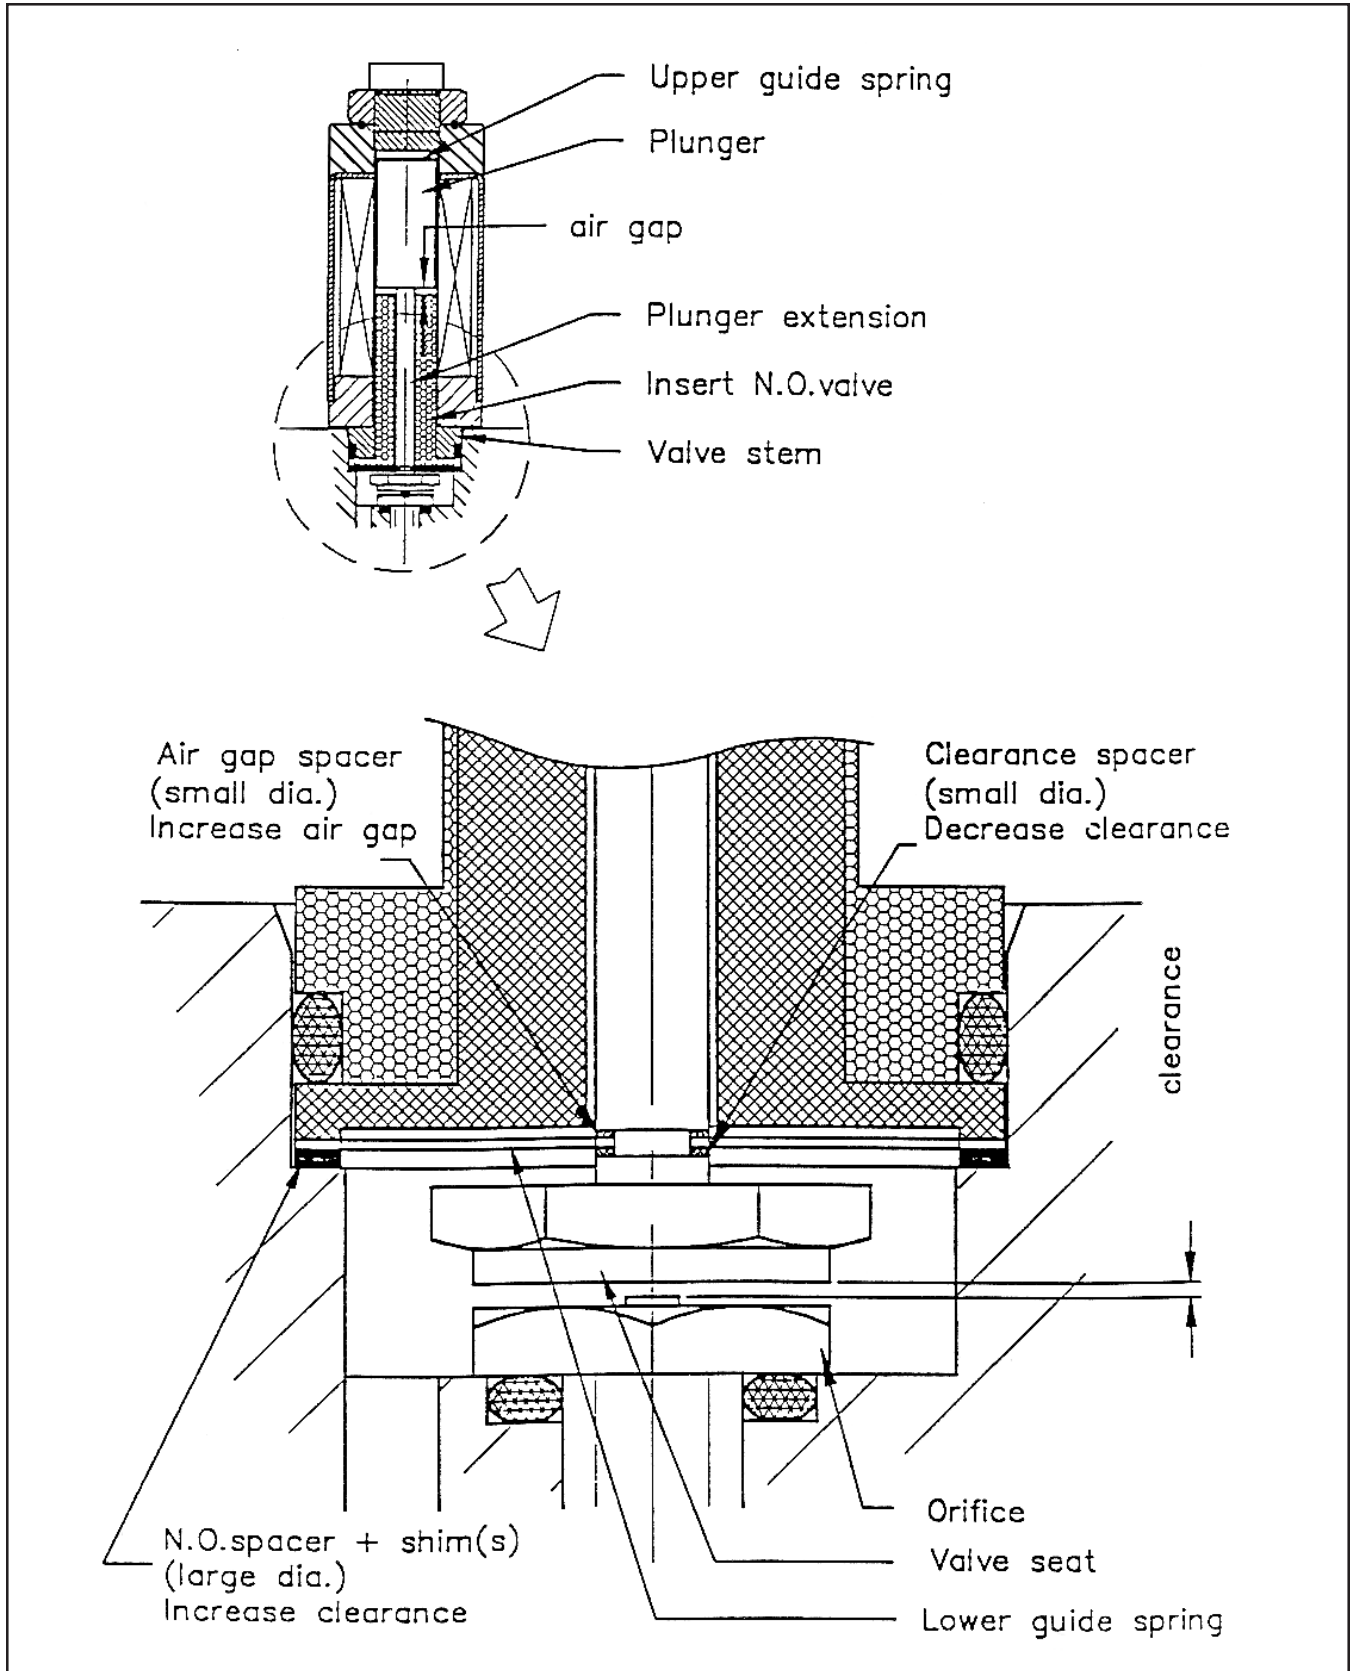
Valve Adjusting Spacer Locations (Normally Open Valve)
